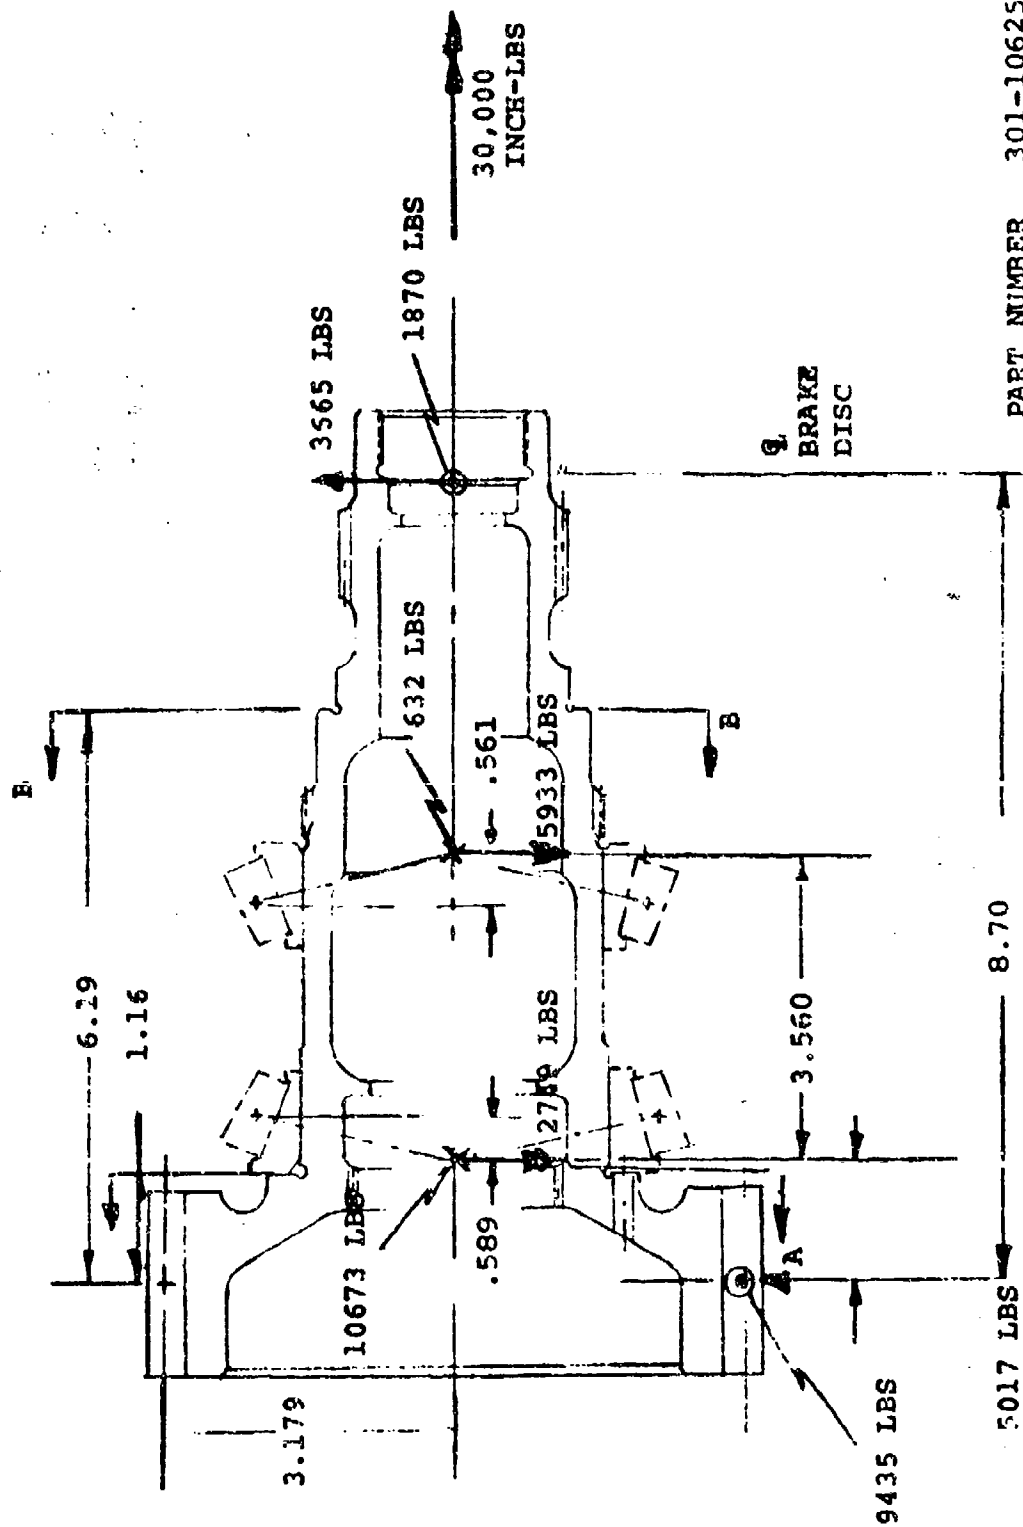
Shaft, Clutch - Inner, Combiner Transmission.
